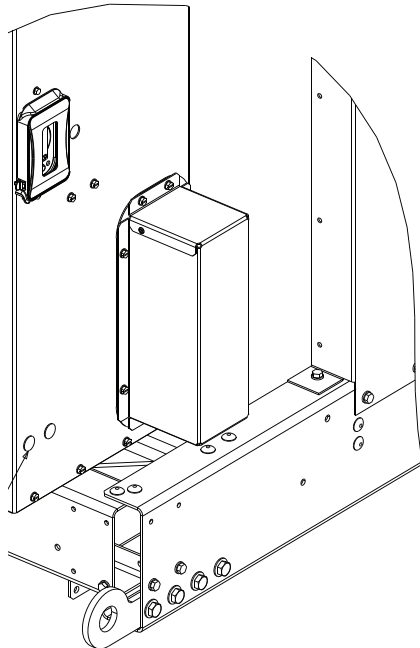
Field wiring, 280 to 500 ton — sheet 2
